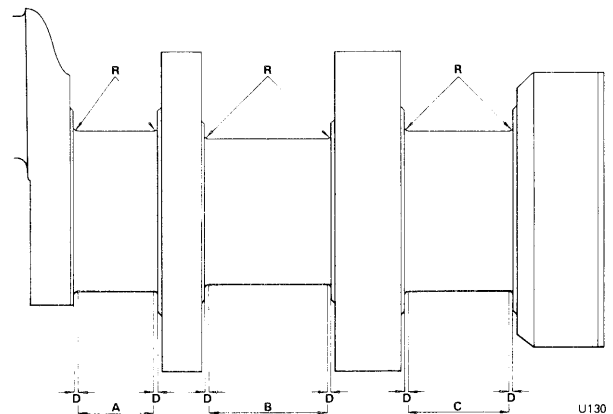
CRANKPIN AND JOURNAL GRINDING DIMENSIONS
